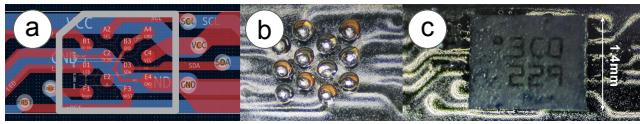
From layout routing to PCB and assembly: microscopic imprecision becomes visible with miniaturization.
